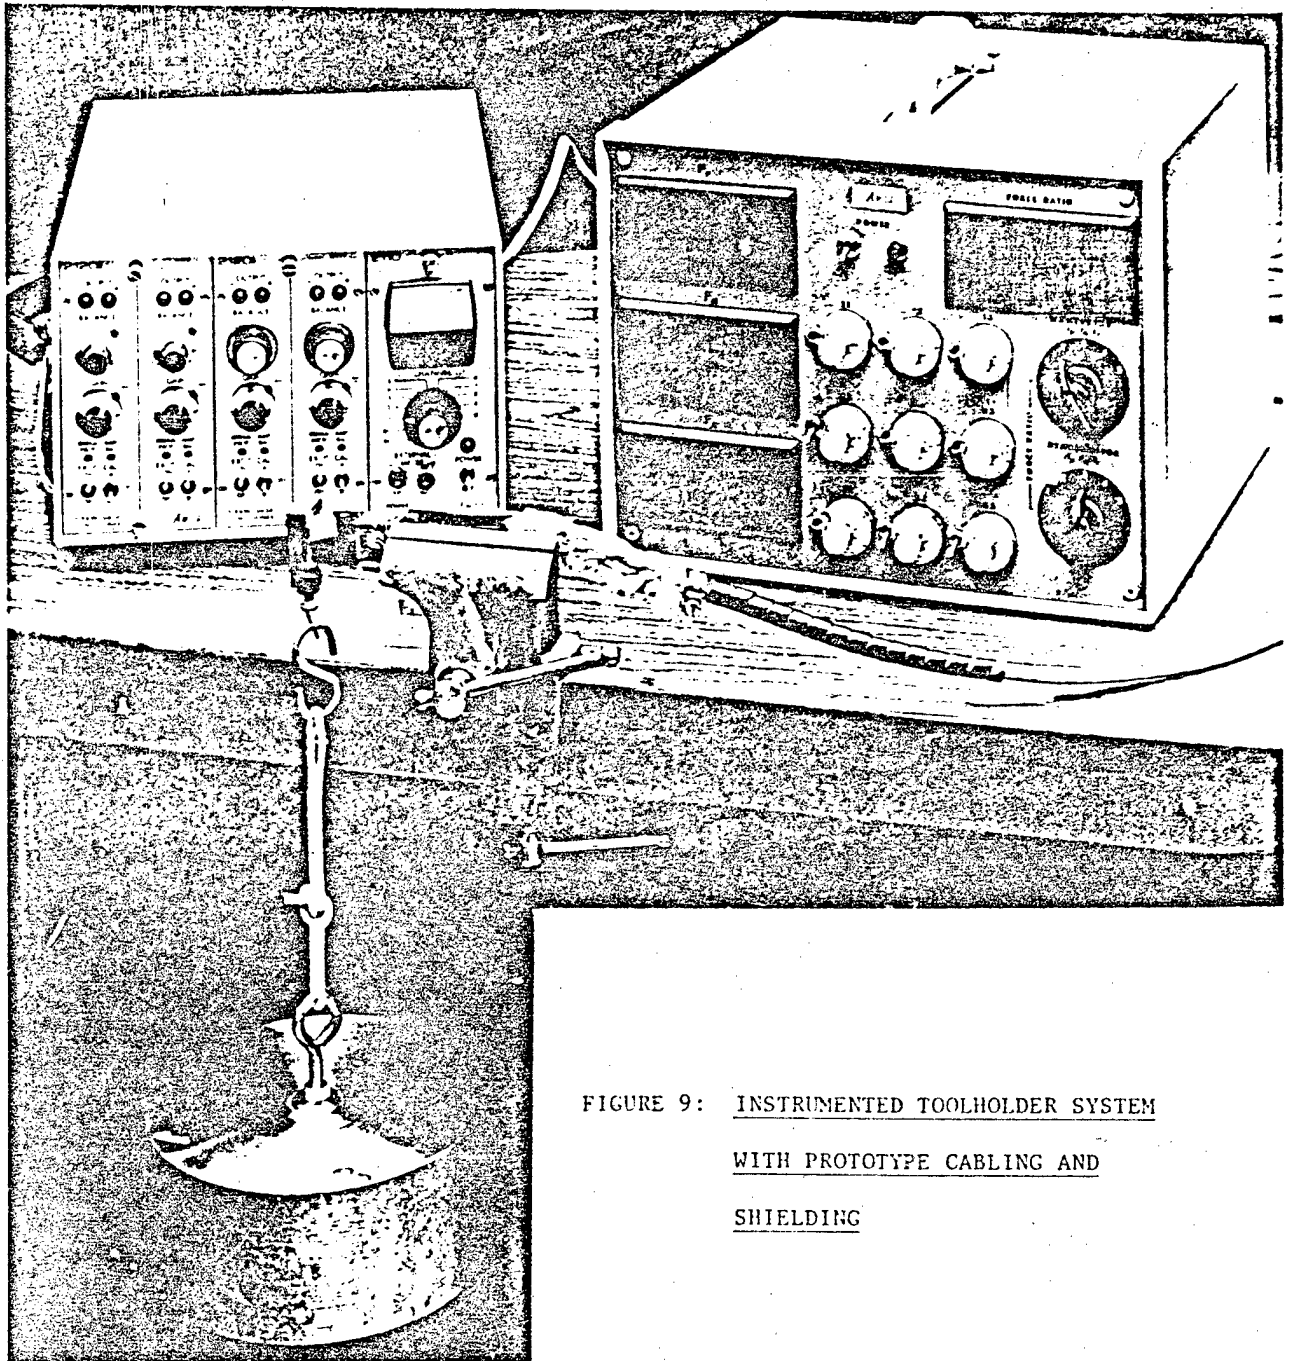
INSTRUMENTED TOOLHOLDER SYSTEM
